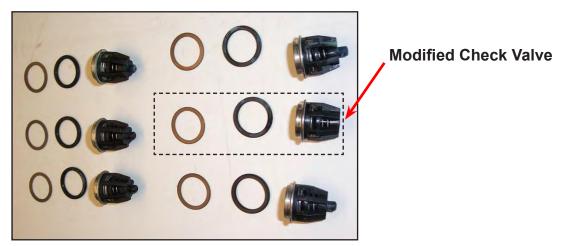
Replace Center Inlet Check Valve with Modified Check Valve
